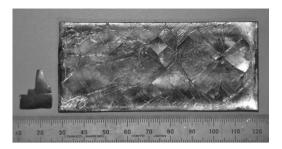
Photograph of a tungsten coating on commercial ferritic steel (SUS430) obtained by conventional in-air explosive welding.
